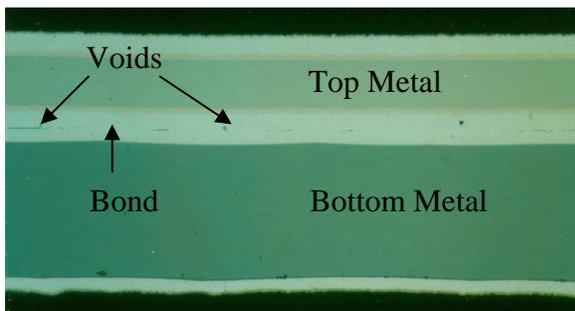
Diffusion bond created by resistance welding technology.
